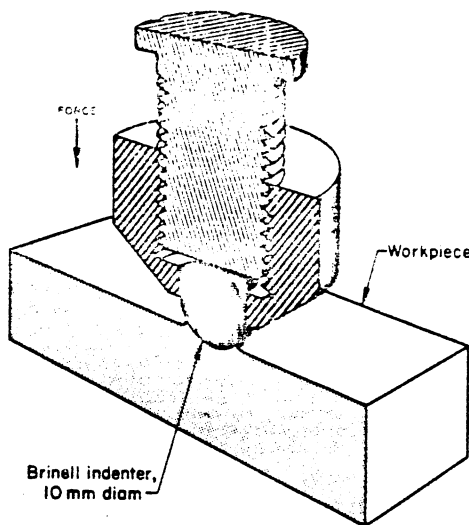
Sectional view of a Brinell indenter, showing the manner in which the application of force by the indenter causes the metal of the workpiece to flow
